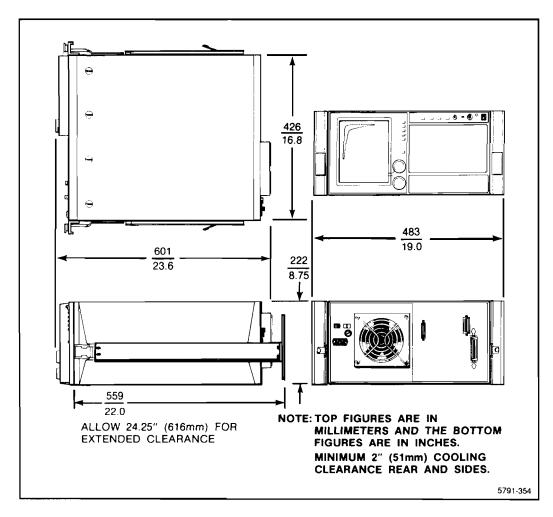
Rackmount 11401/11402 dimensional drawing.
